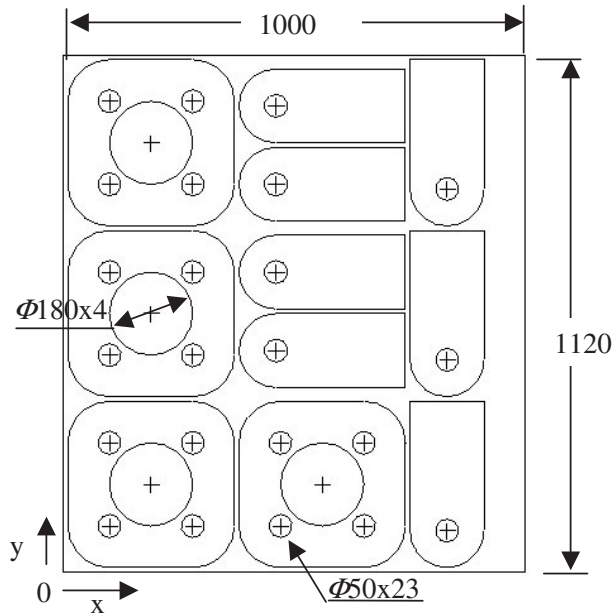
Batch of work pieces to be machined in the combined punch-and-laser machine (unit:mm).
